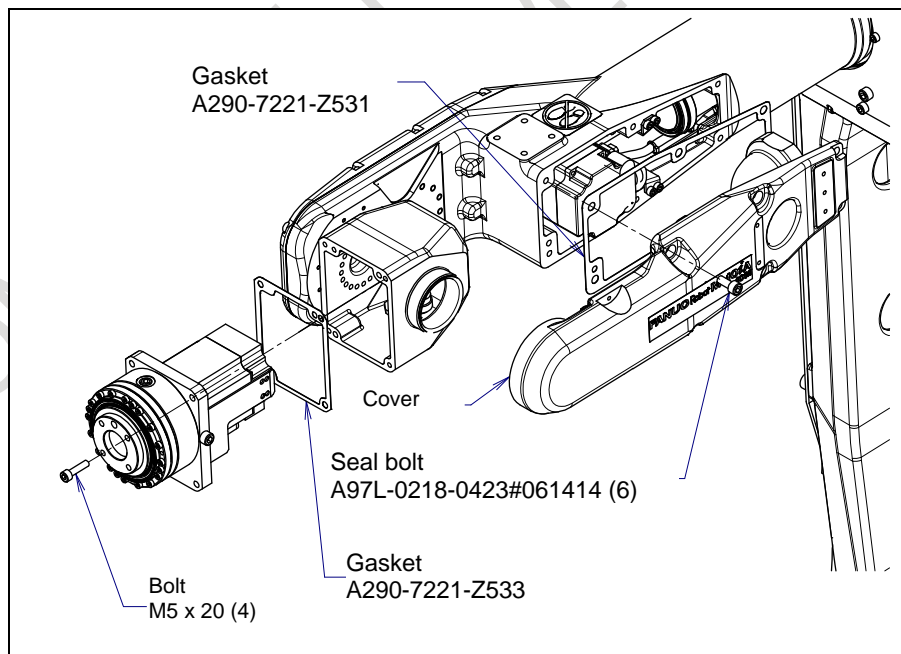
(d) Replacing cable kit (J3 arm to wrist part) (10M/10MS)
